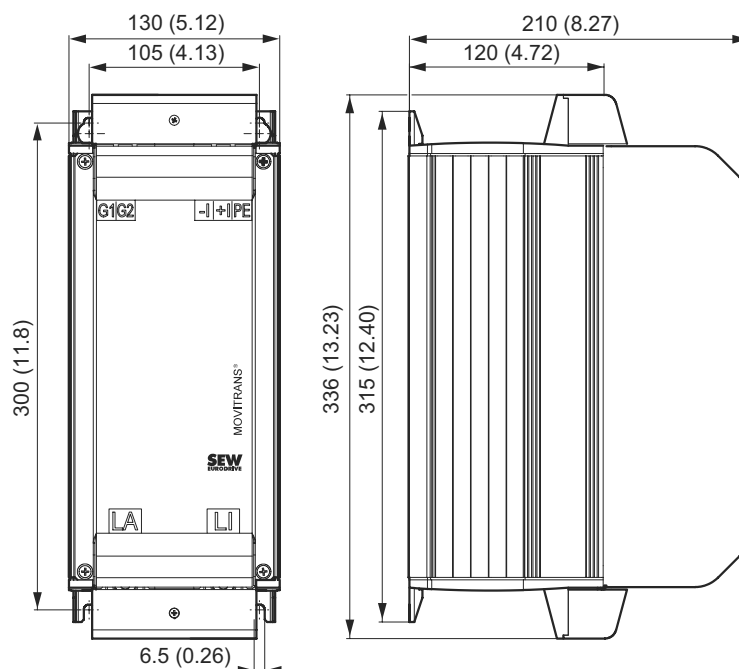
Dimensions for MOVITRANS® size 2, dimensions in mm (in)
